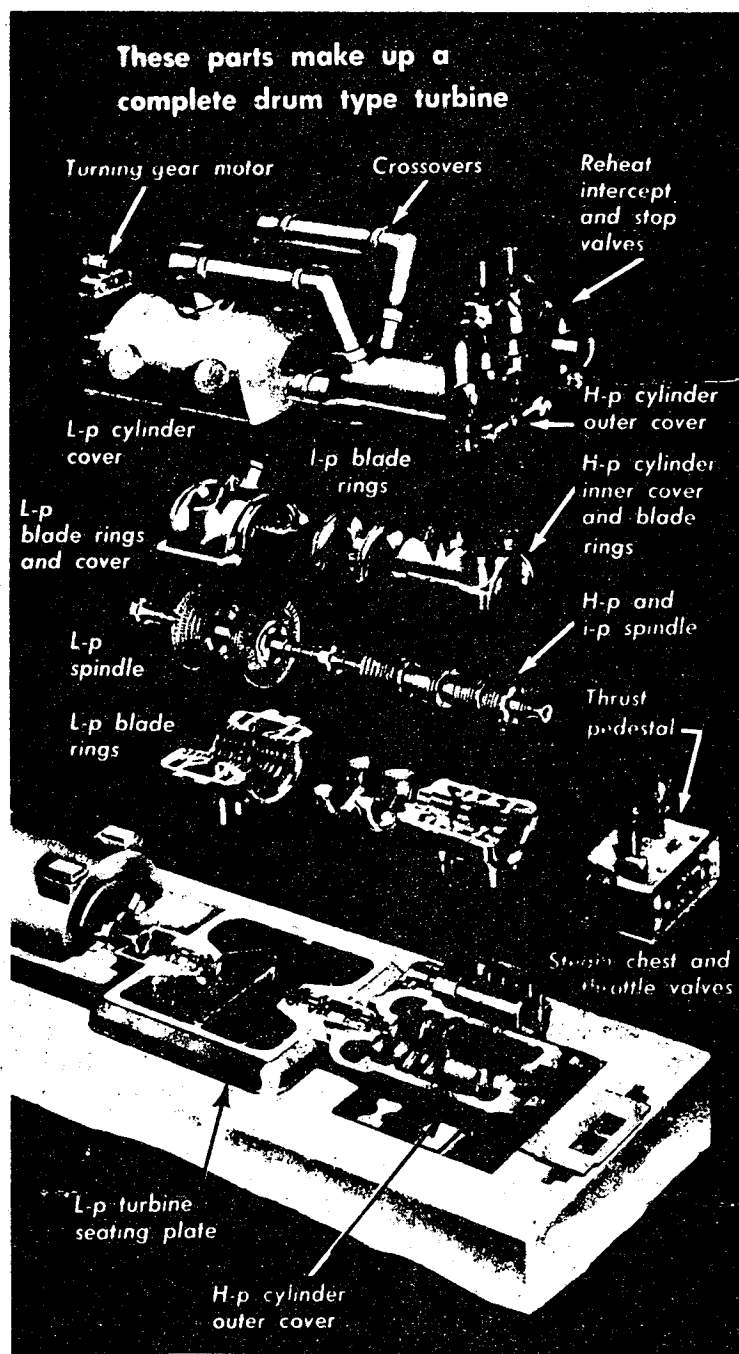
Diagram showing the parts for a large tandem compound turbine and how they are put together, including double casings and carrier rings.
